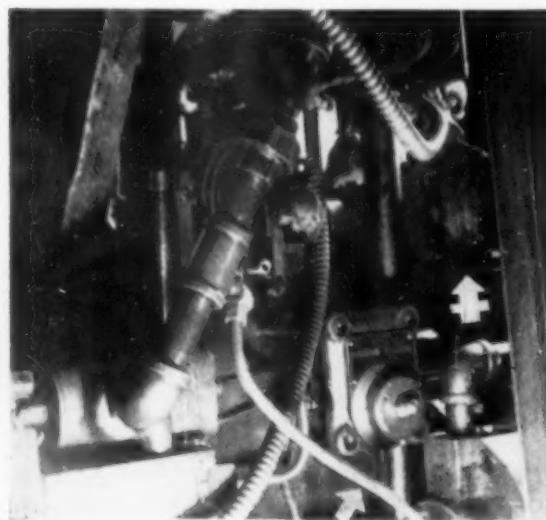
View through the access opening of a production lathe. Note disorder of arrangement, lack of support.
